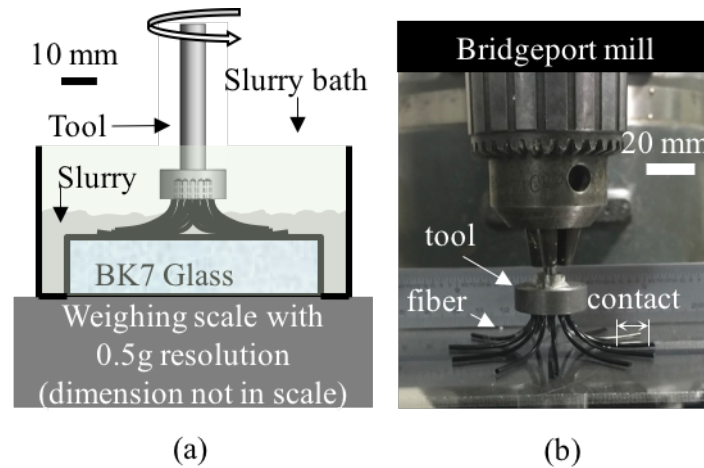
Polishing testbed; (a) schematic of a tool engaged with workpiece in the slurry bath (b) actual tool in contact with a planar surface
